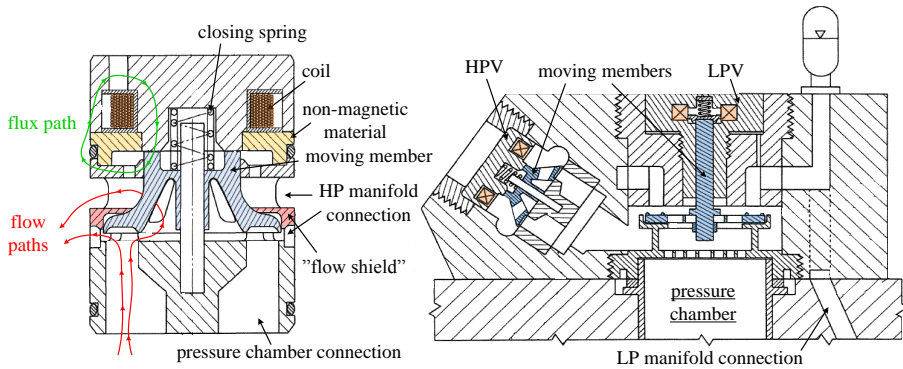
Schematics taken from [60] showing a normally closed annular seat valve (*left*) and a manifold arrangement incl. much simplified valve drawings (*right*).
